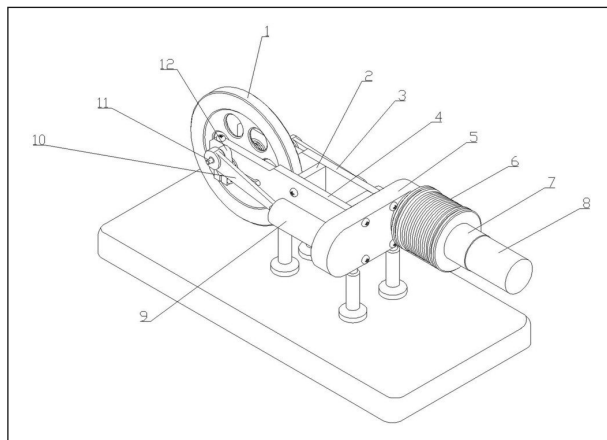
Laboratory Model of Gamma type Stirling engine: 1 — flywheel, 2 — stiffening bar, 3 and 4 — supports, 5 — faceplate, 6 — cooler, 7 — regenerator, 8 — heater, 9 — working cylinder, 10 — rod, 11 — crank of the working piston, 12 — crankshaft.
